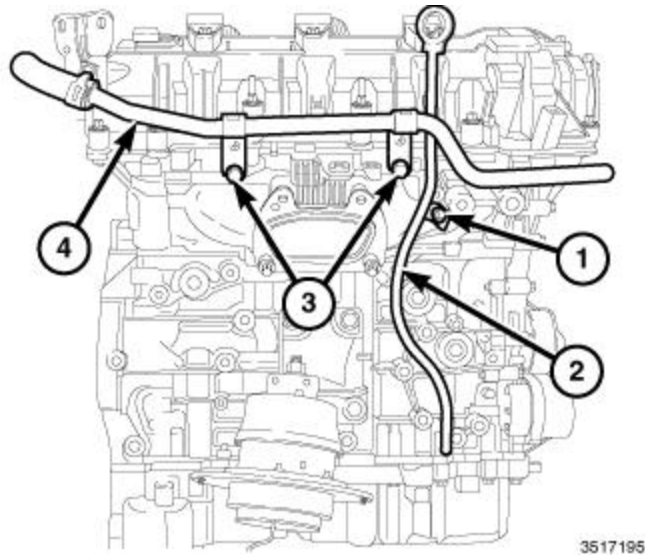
Heater Core Inlet Tube, Oil Level Indicator & Bolts
